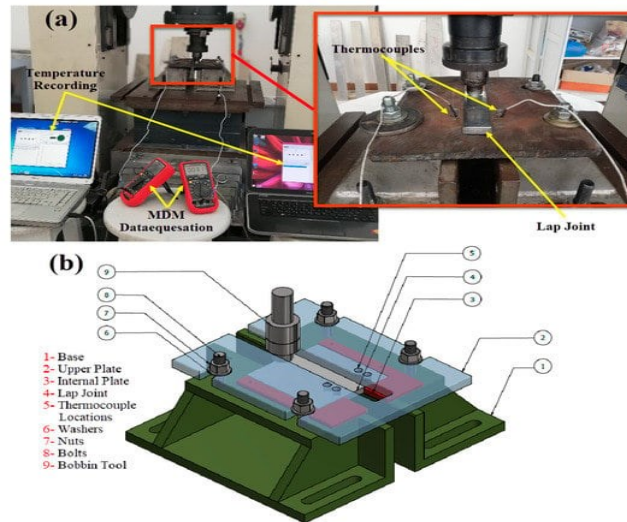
BT-FSW fixture setup configuration to weld AA1050-H14 in similar lap joints at the different welding parameters. (a) overview the BT-FSW using this fixture and (b) the 3D drawing with identification of all components.
